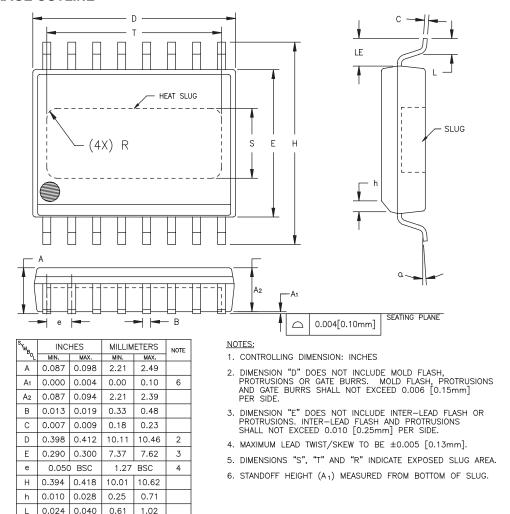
S7 Package Outline - 16 Pin Wide Body SOIC with Heat Slug
